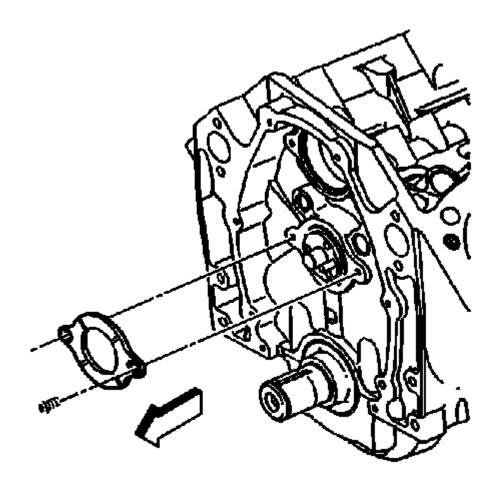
View Of Camshaft Retainer & Bolts Courtesy of GENERAL MOTORS CORP.
